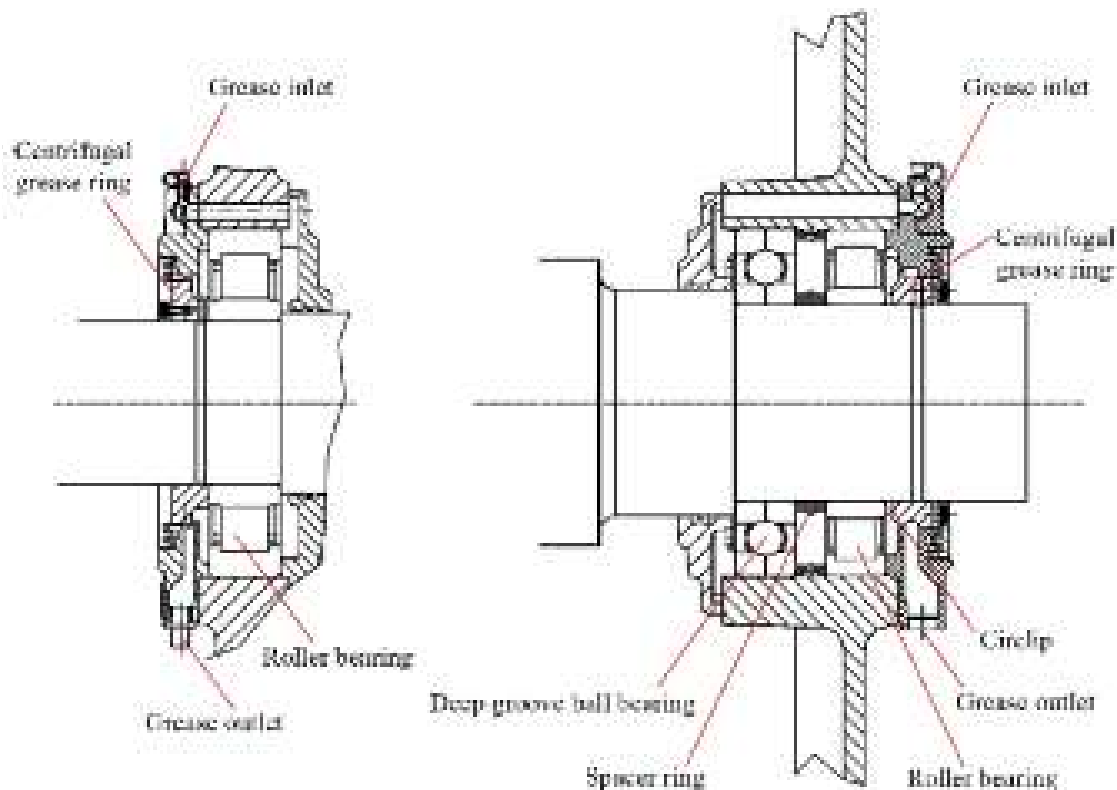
Fan motor bearing configuration for the horizontal two-stage double-ended motor fan.
